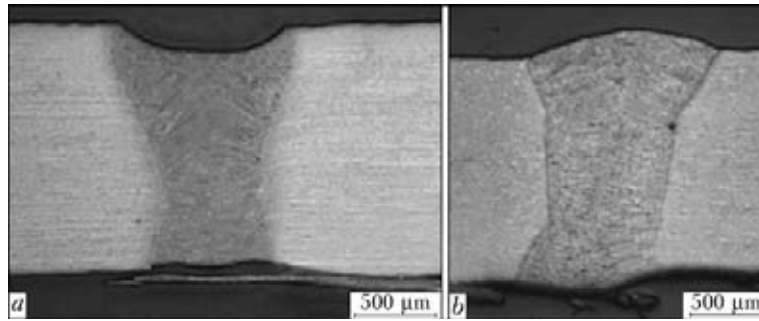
Butt weld with shear (a) and laser (b) cut edges
